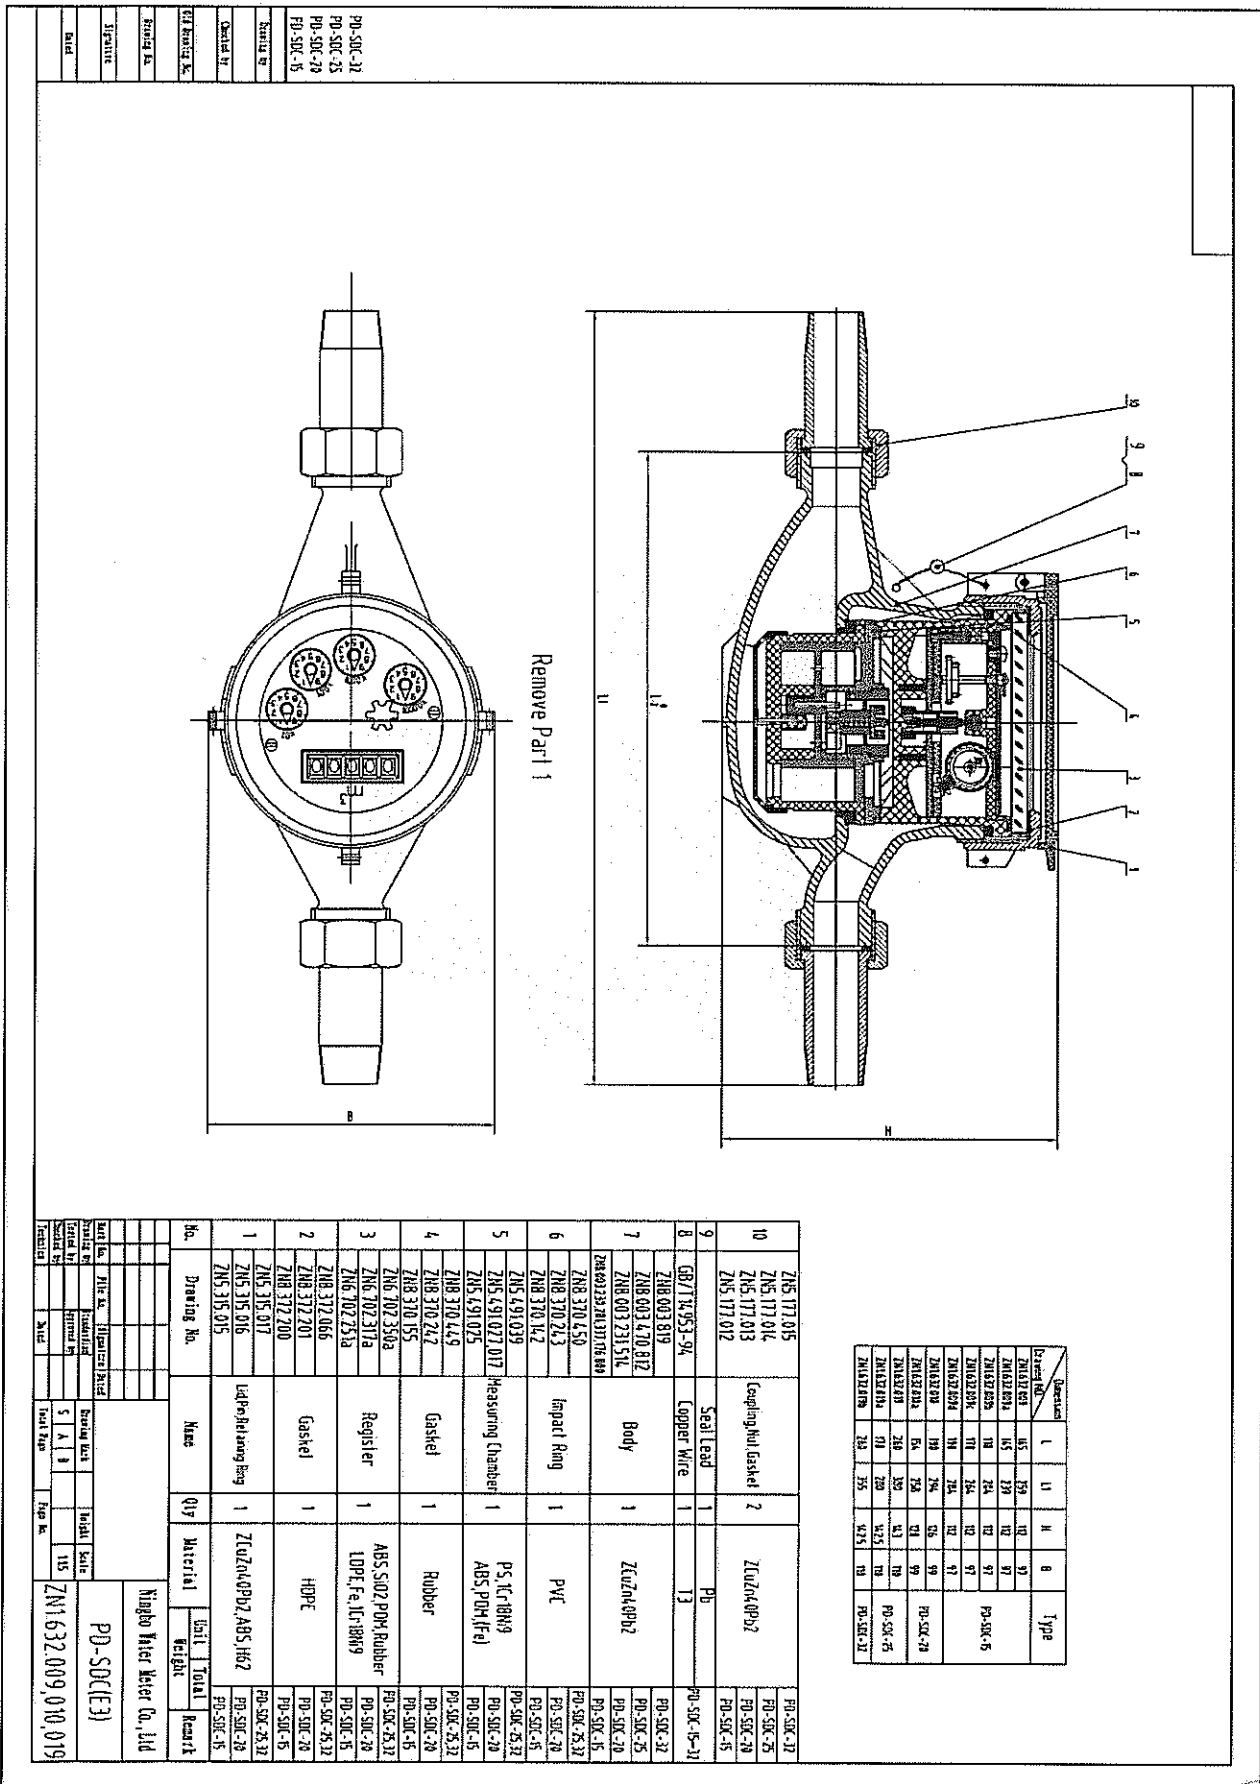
The water meter type PD-SDC (E4) assembly drawings:
